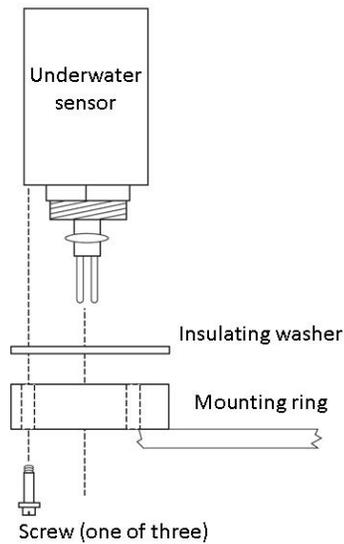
Attachment of the underwater sensor to the mounting rings (adapted from LI-COR, 2006)
